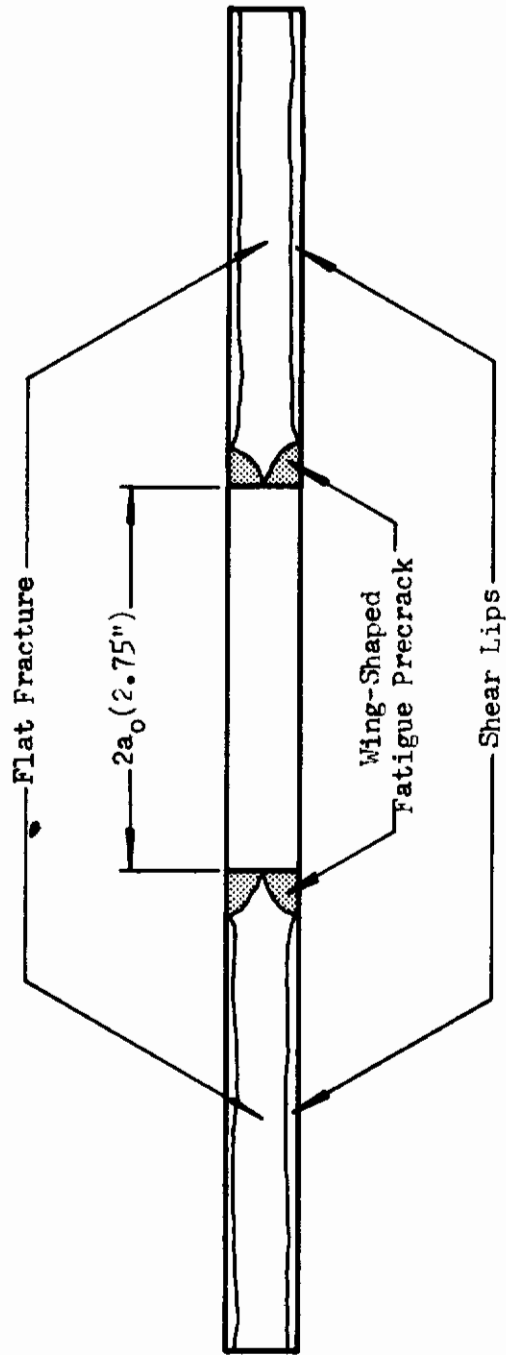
Sketch Showing the Central Area of a Fractured Half of a 1/2-In.-Thick, 18% Nickel Maraging Steel Center-Notch Tensile Specimen .
